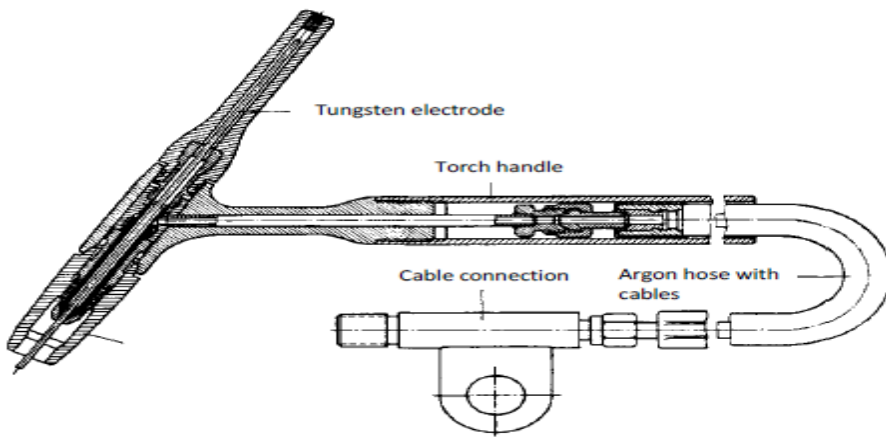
Sectional view for Air-cooled GTAW welding torch
